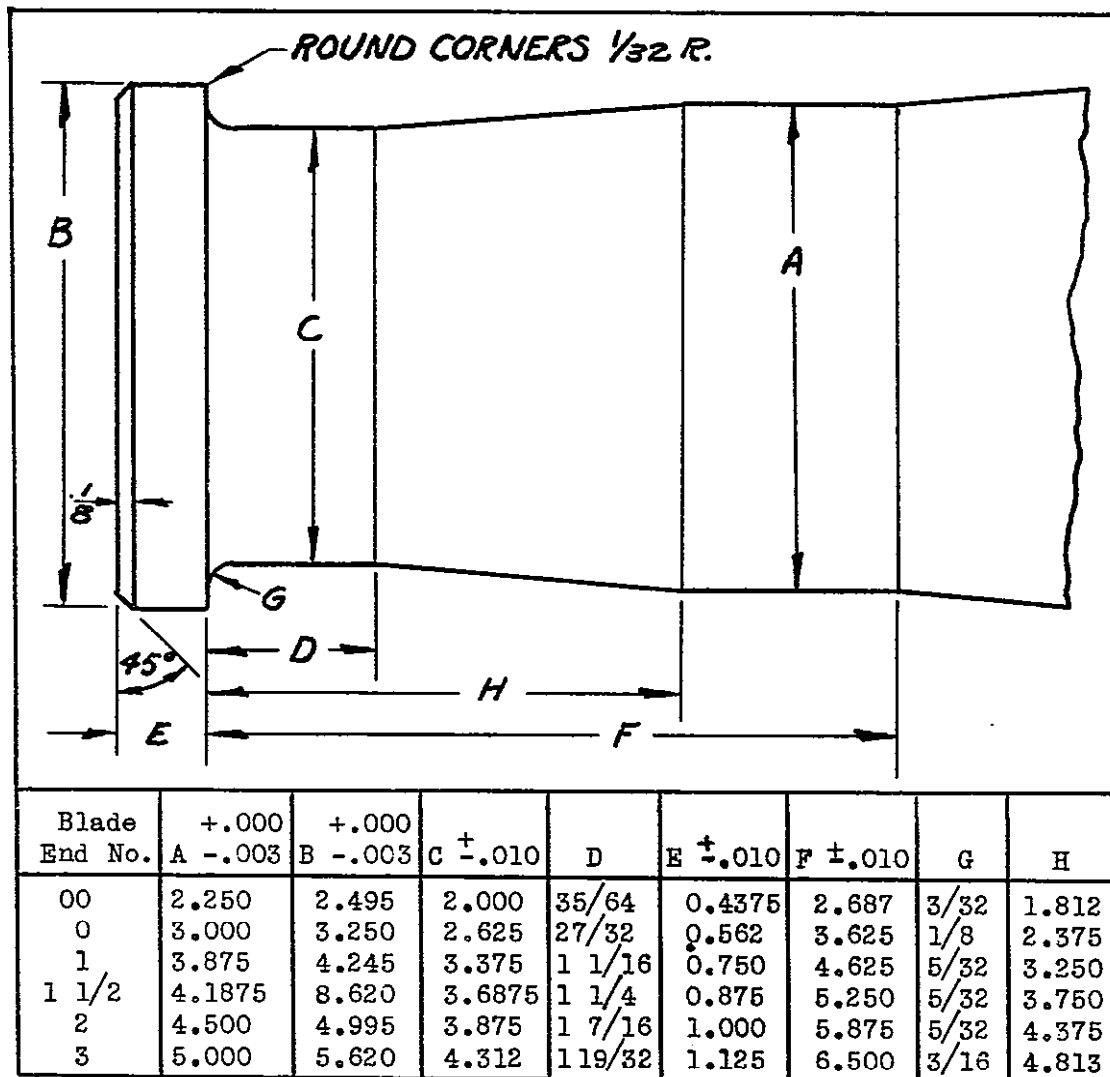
HOLLOW STEEL BLADE END DIMENSIONS.
